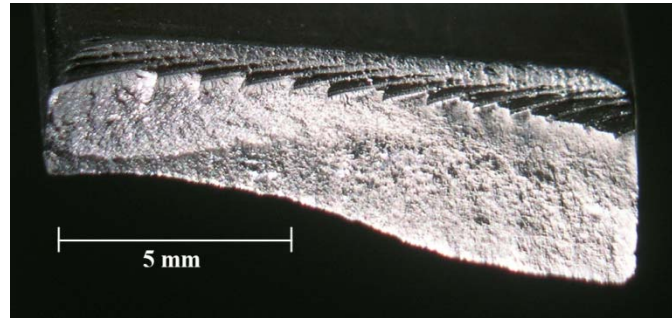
Typical fracture surface for welding conditions A ( $v = 10$  mm/s;  $\omega = 600$  rpm) and B ( $v = 10$  mm/s;  $\omega = 900$  rpm)
